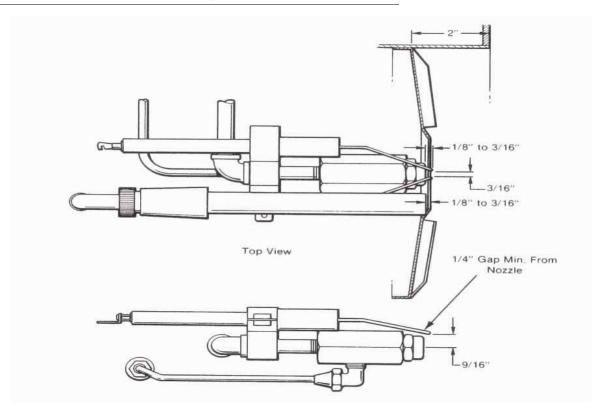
MM 34-63 Drawer Assembly Dimensions
